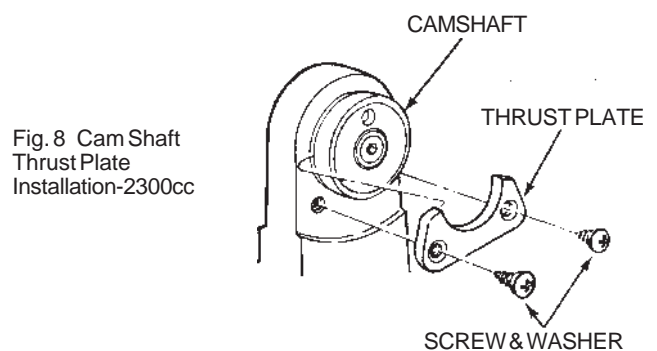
Cam Shaft Thrust Plate Installation-2300cc
